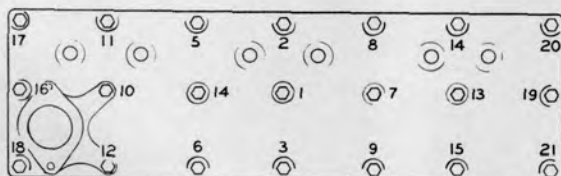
Cylinder Head Stud Nut Tightening Sequence
